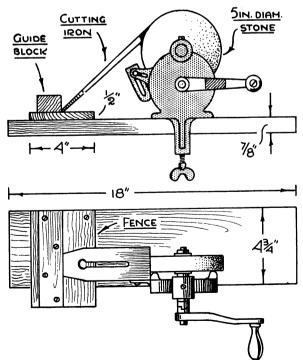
ELEVATION AND PLAN SHOWING GRINDING OF A PLANE IRON.
